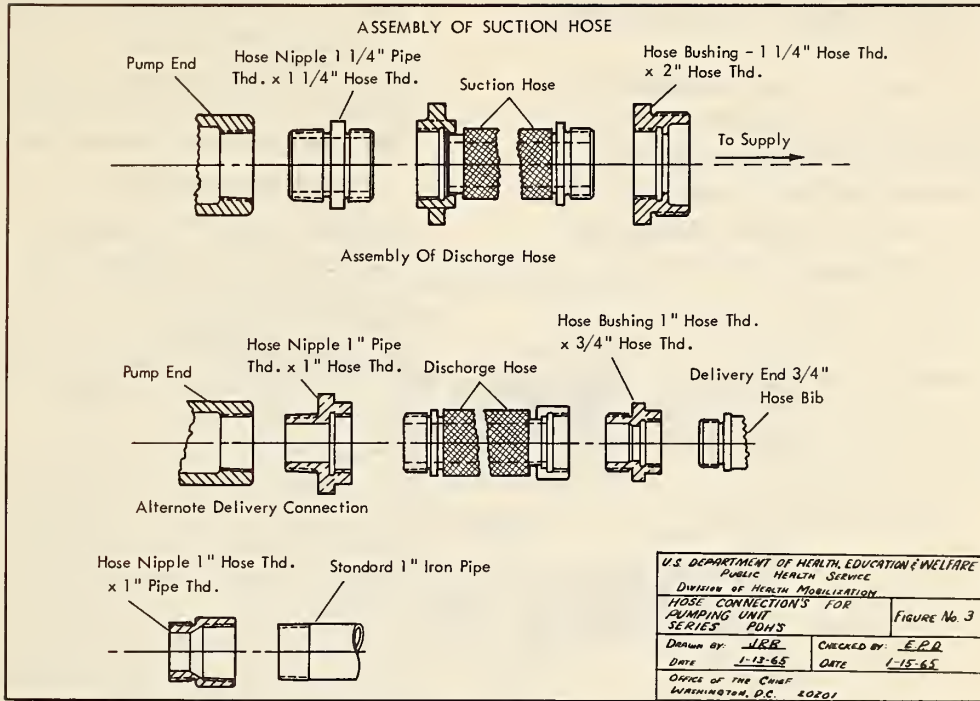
ASSEMBLY OF SUCTION HOSE
